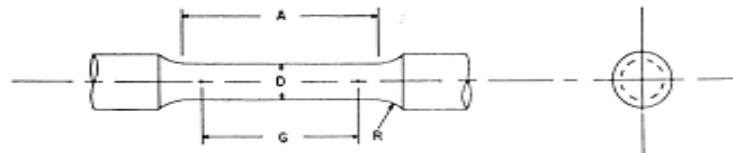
Tensile specimen with specific variables of specimen dimension.
